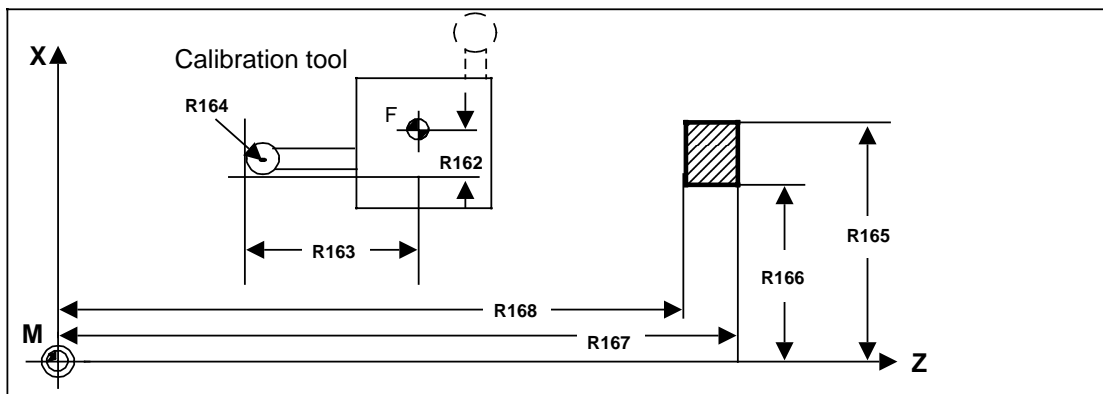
Overview MDC: Tool probe: Calibration tool (X and Z axes mirrored)
